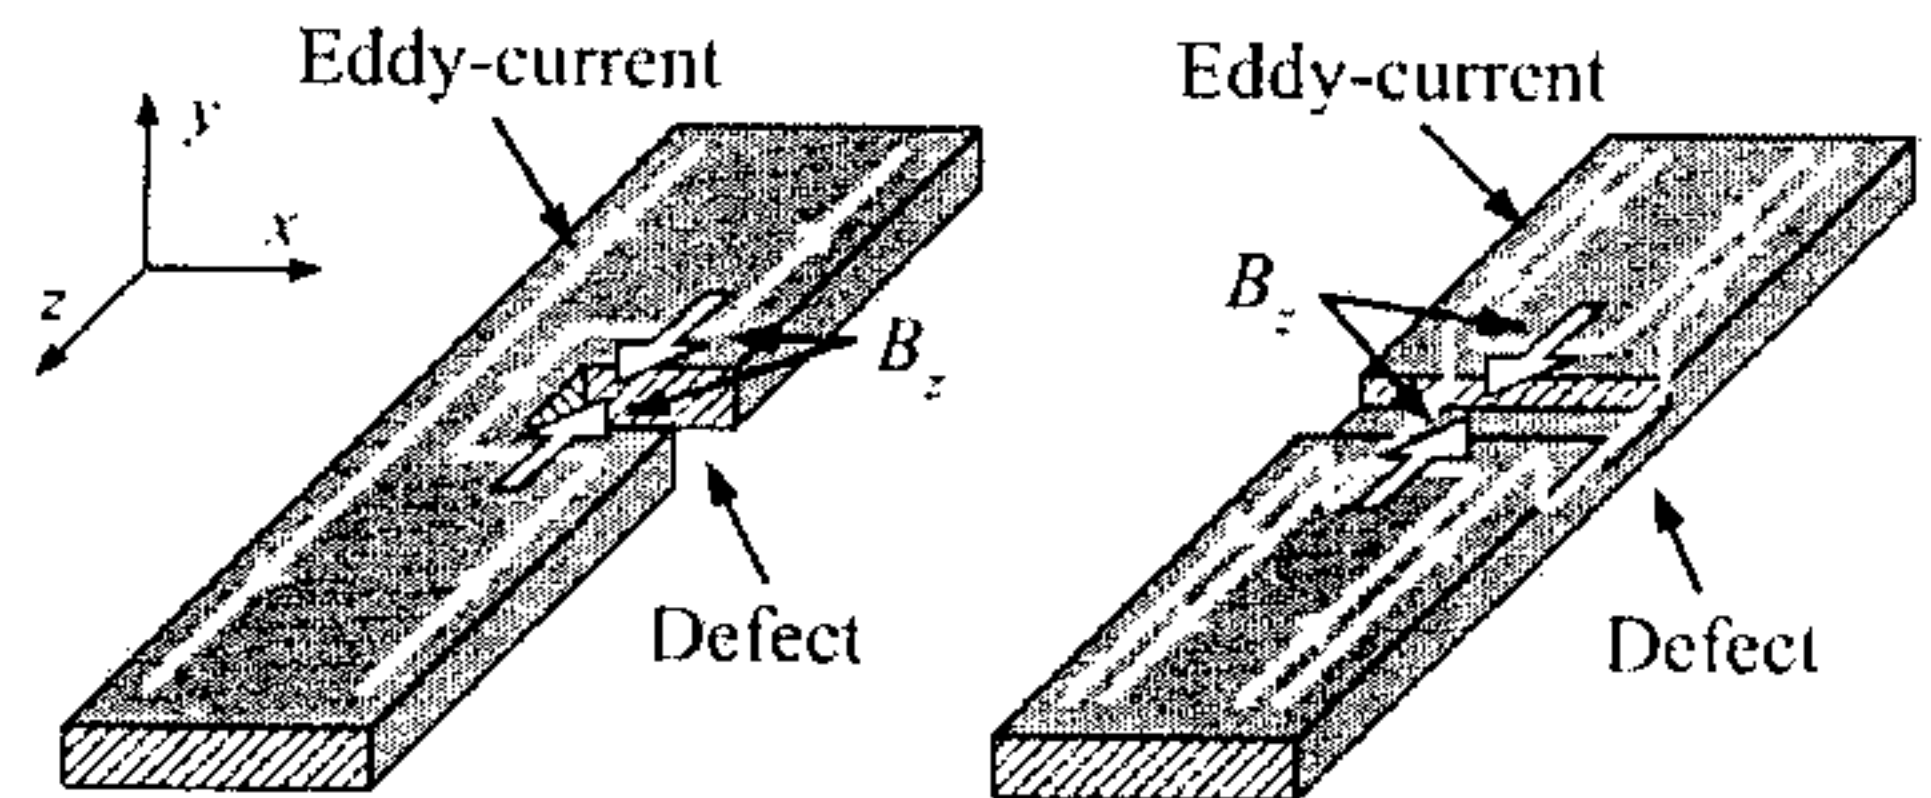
Eddy-current paths of partial defects on PCB
